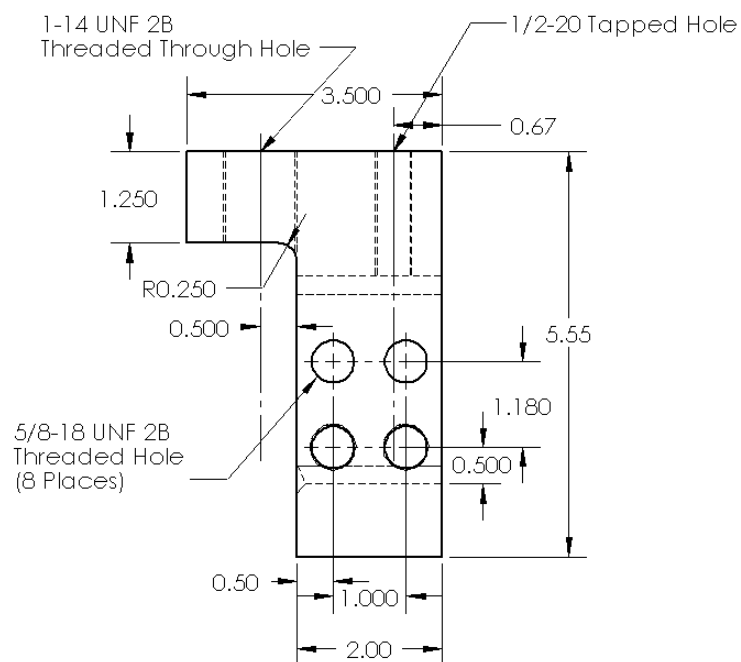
Front view of the Combined Loading Shear test fixture. All dimensions are in inches.
